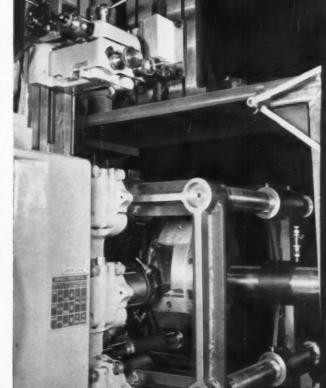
Special fixture mounted on a three-spindle, tracer-controlled milling machine for cutting curved die inserts from two-dimensional masters.
